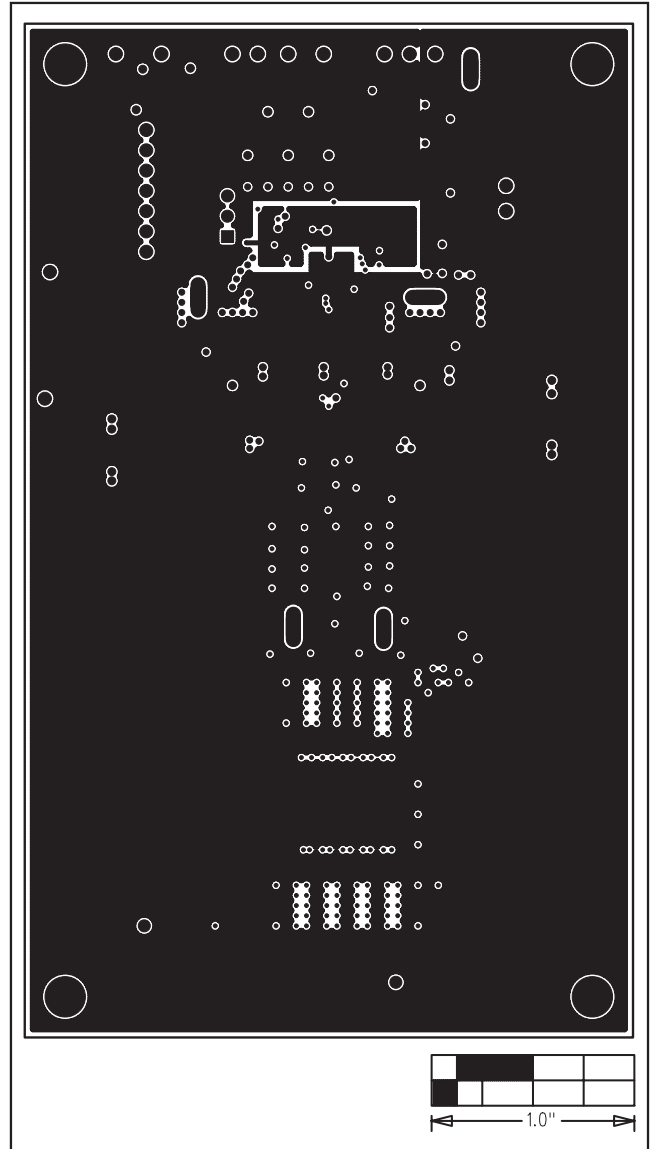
MAX17021 EV Kit PCB Layout —Internal Layer 5 (AGND/PGND Layer)
